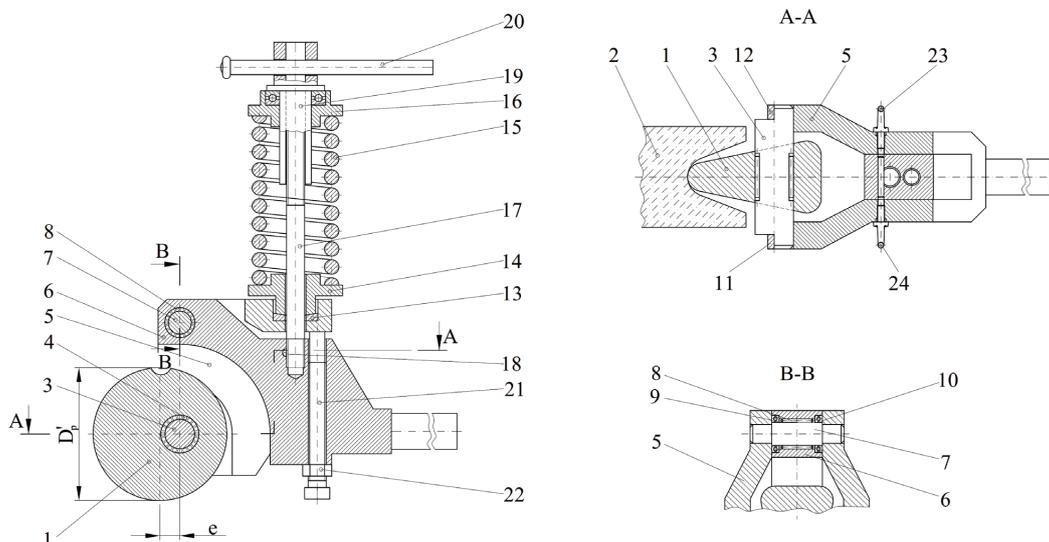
The device for reeling rope blocks with a wedge roller: roller (1); reeled part (2); shaft (3, 7); bearings (4, 8, 9, 10); lever (5); bracket (6); plates (11, 12); spherical washer (13); sleeve (14); spring (15); sleeve (16); pulling rod (17); pin (18); nuts (19, 22); handle (20); screw (21); eye bolts (23, 24)
